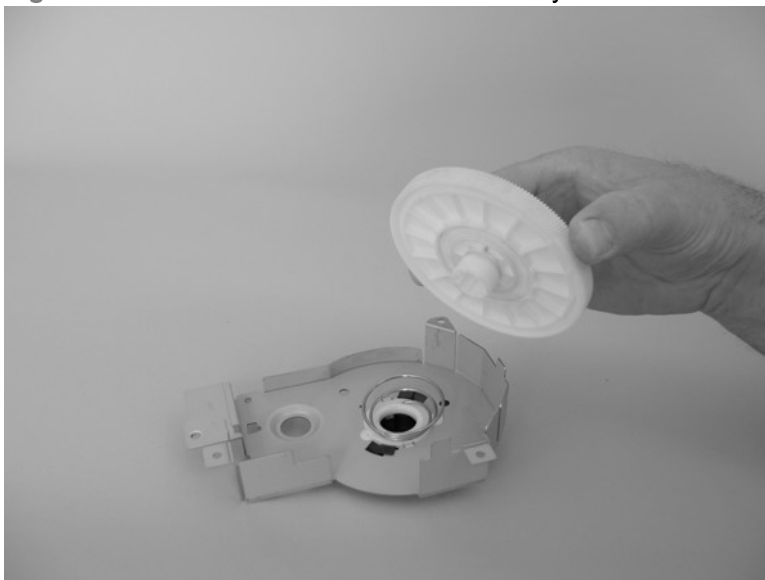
Remove the drum-drive assembly (4 of 4)
